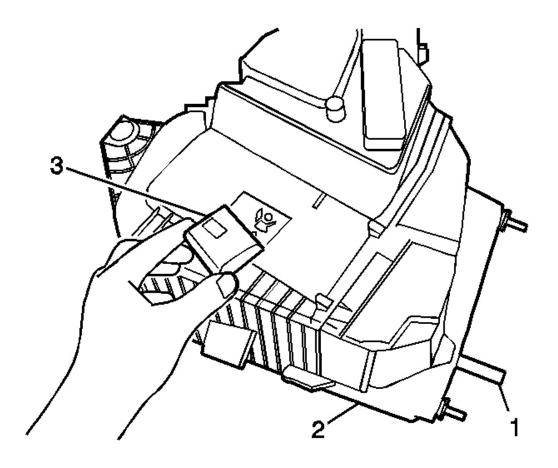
Removing/Installing Blower Motor Control Processor - Auxiliary Courtesy of GENERAL MOTORS CORP.
